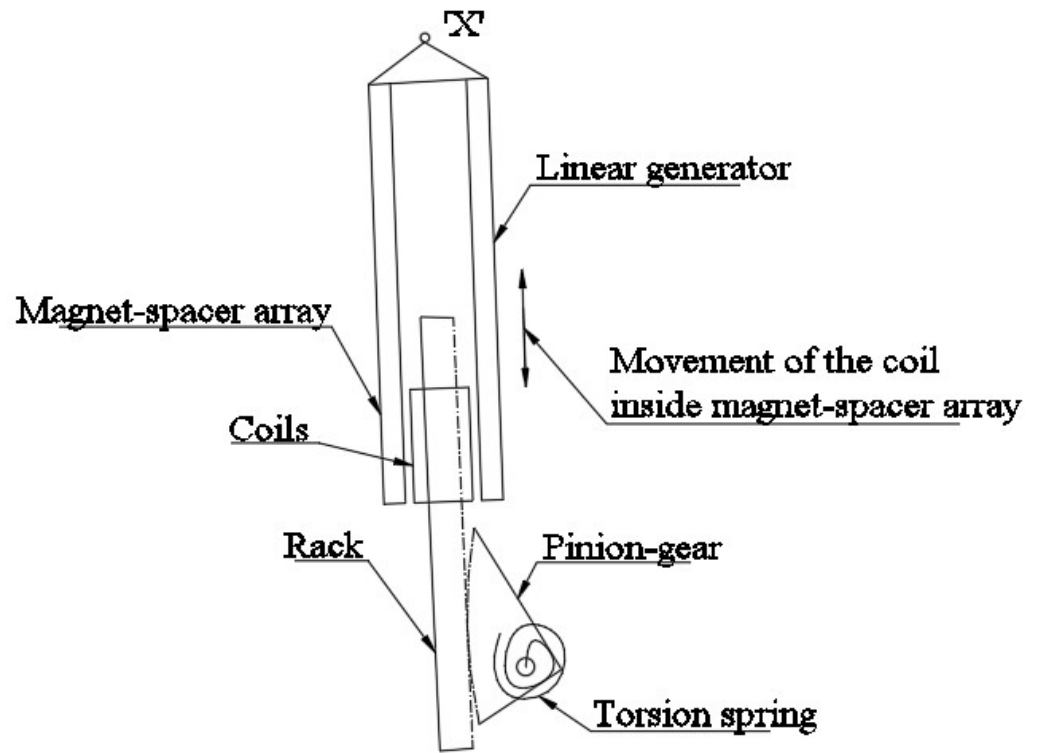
Arrangement with an elliptical gear-rack and oscillating linear generator.
